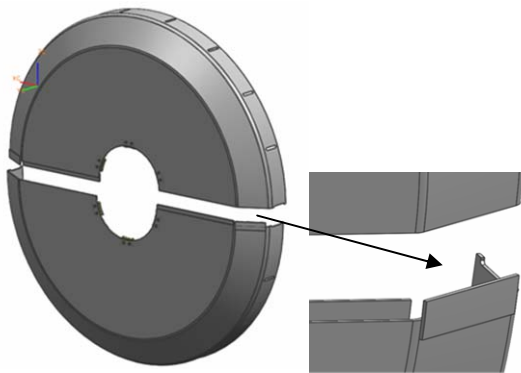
Detail of the end shield segments, with the spot welded lips to ensure minimal axial field penetration.
